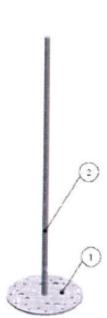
Anchors, type: ZSM 300-800 III B / B-S / HD-B / H
